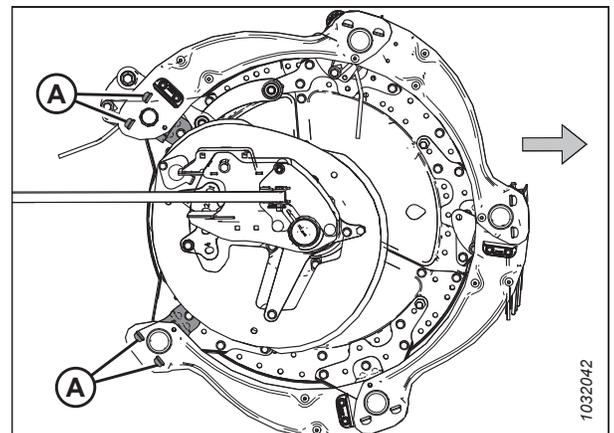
Reel Endshield Removed – Outboard Cam End
